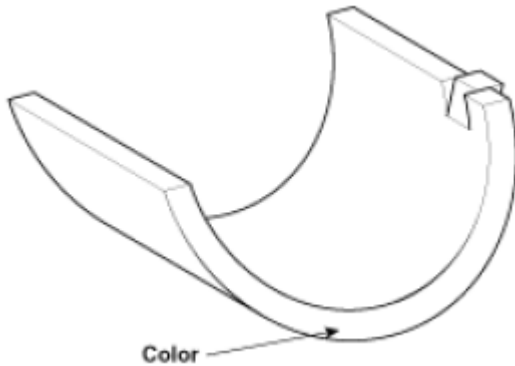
Identifying Connecting Rod Bearing Identification Mark
